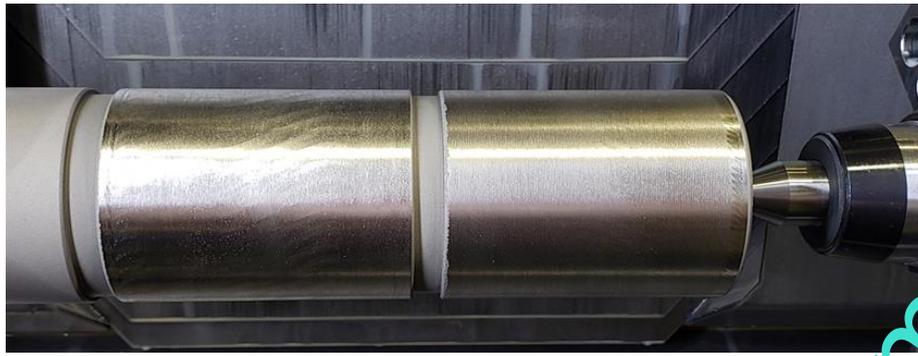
Workpiece with a machined layer of NiCrBSi coating
